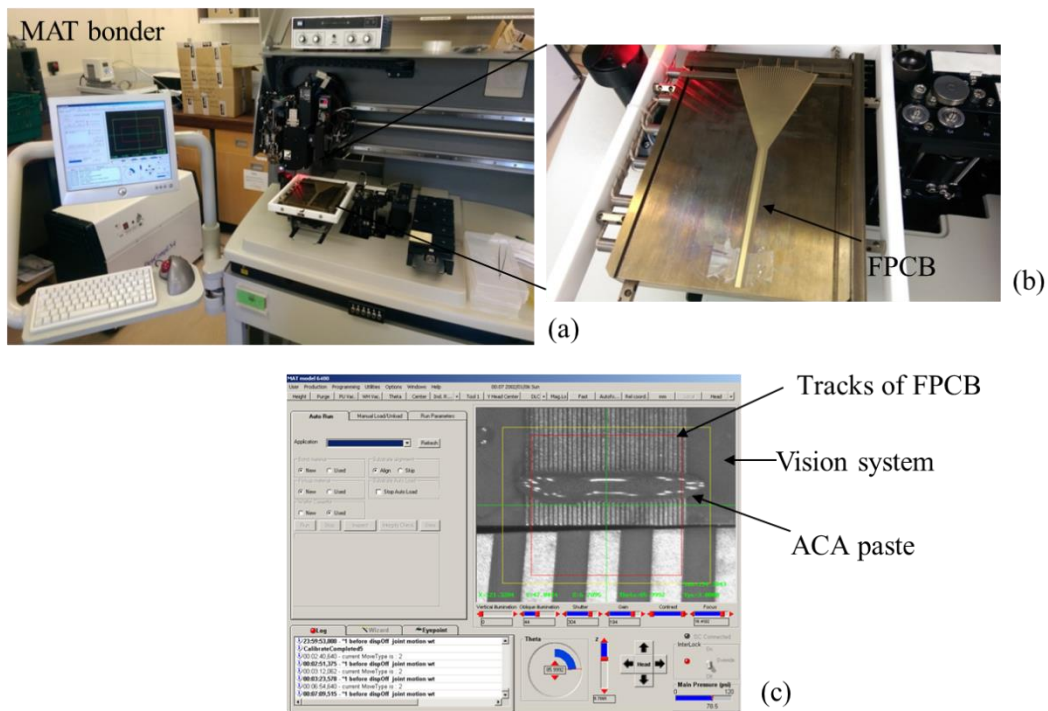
(a) MAT 6400 flip chip bonding machine for assembly of array and FPCB connection (b) Stage on MAT 6400 to secure FPCB in place for alignment and bonding (c) Image on MAT 6400 showing dispensed paste across bonding area of FPCB
